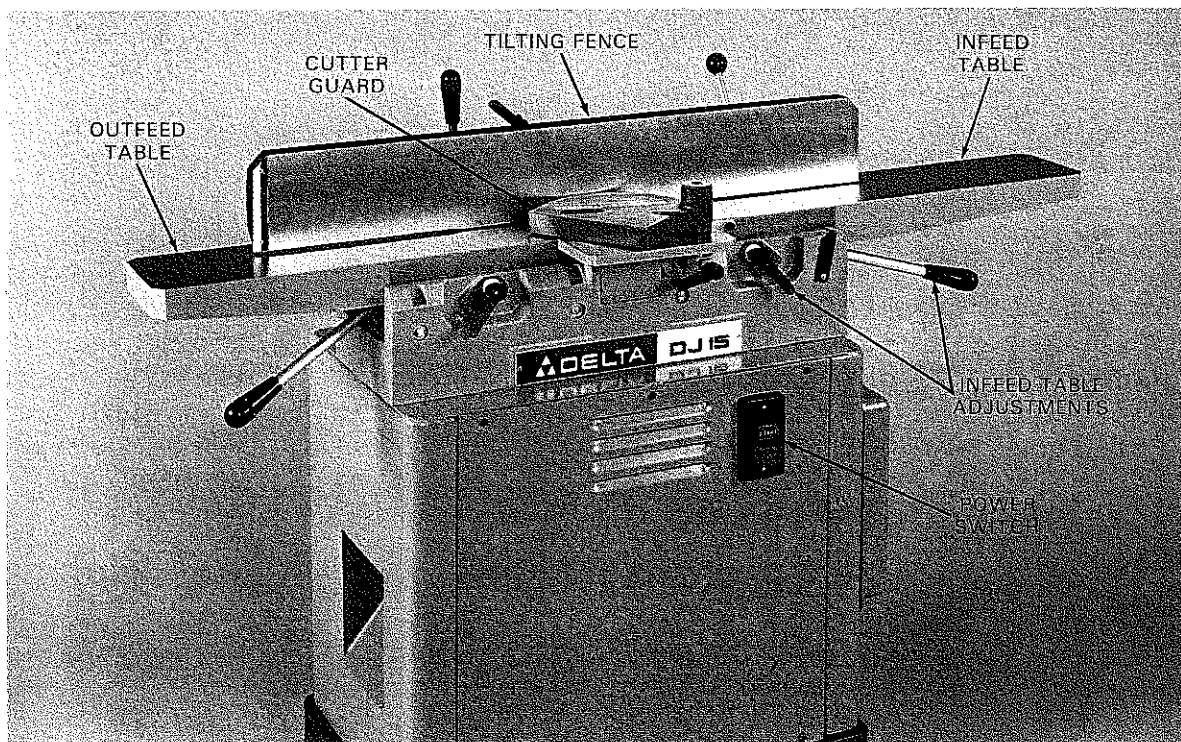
A jointer is used to surface the face, edge, or end grain of wood. (Delta International Machinery Corp.)
